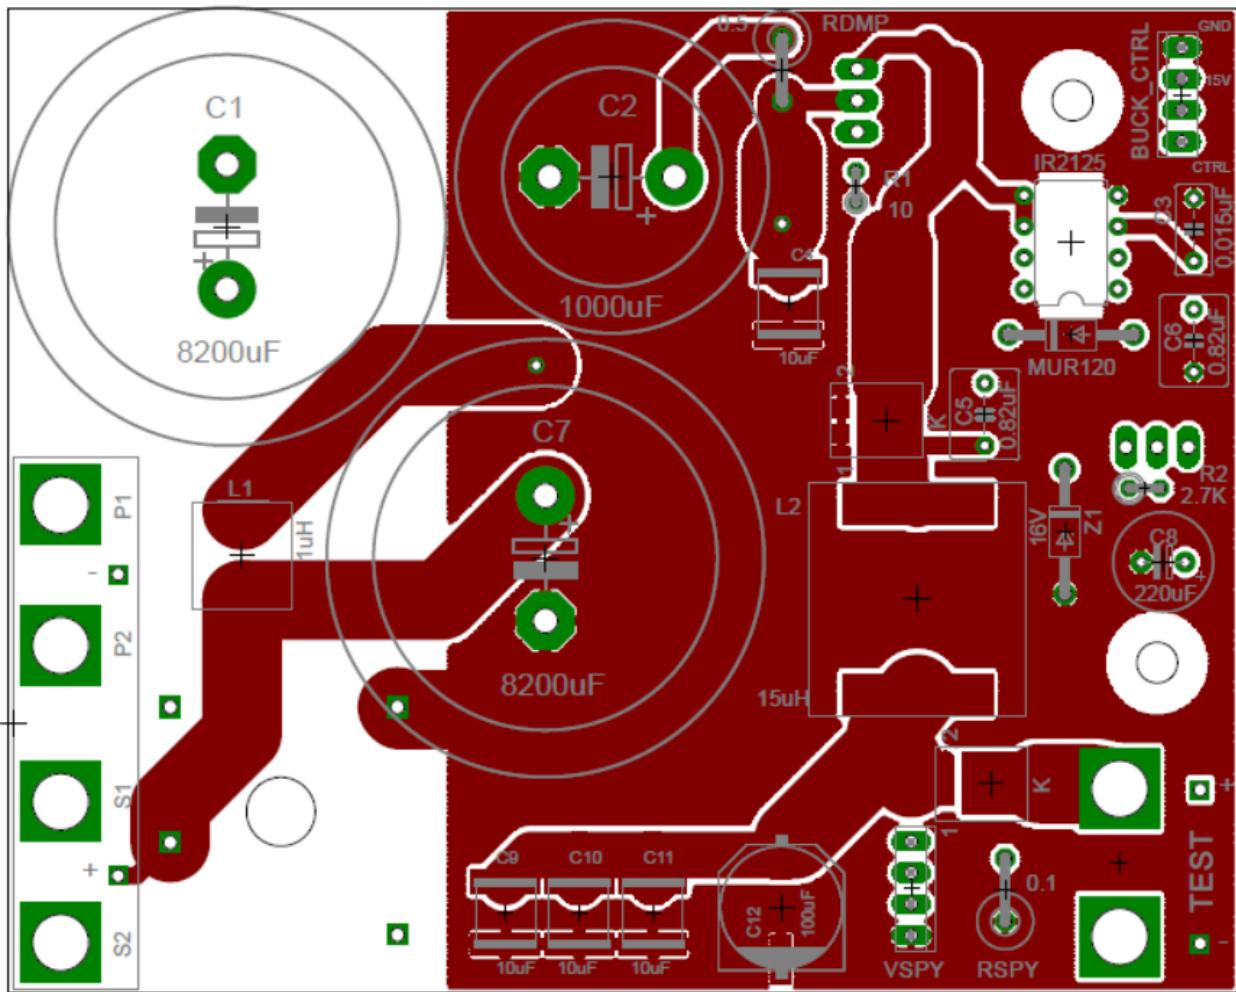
Eagle® PCB Design: Top Side Traces with Ground Pour
